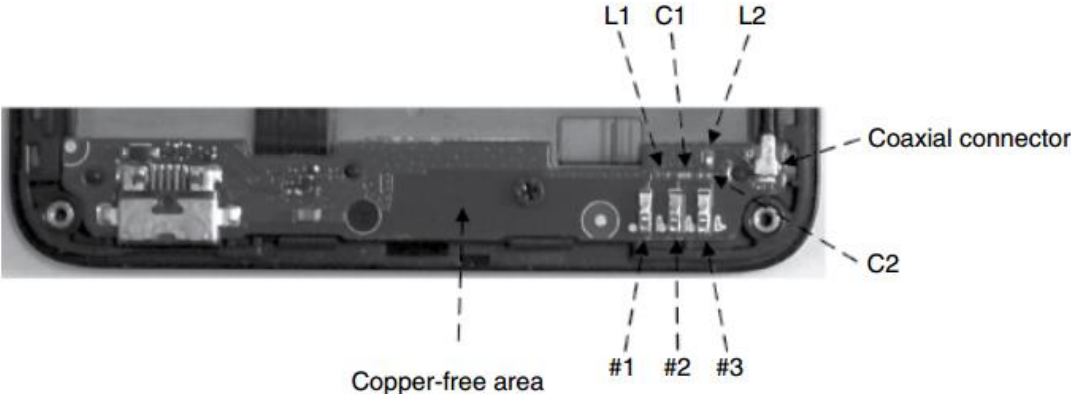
Matching circuit of antenna built onto the PCB by SMD components
